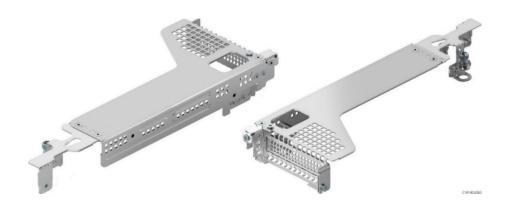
Bracket for Riser Card on Riser Slot #2- Front and Back Views
